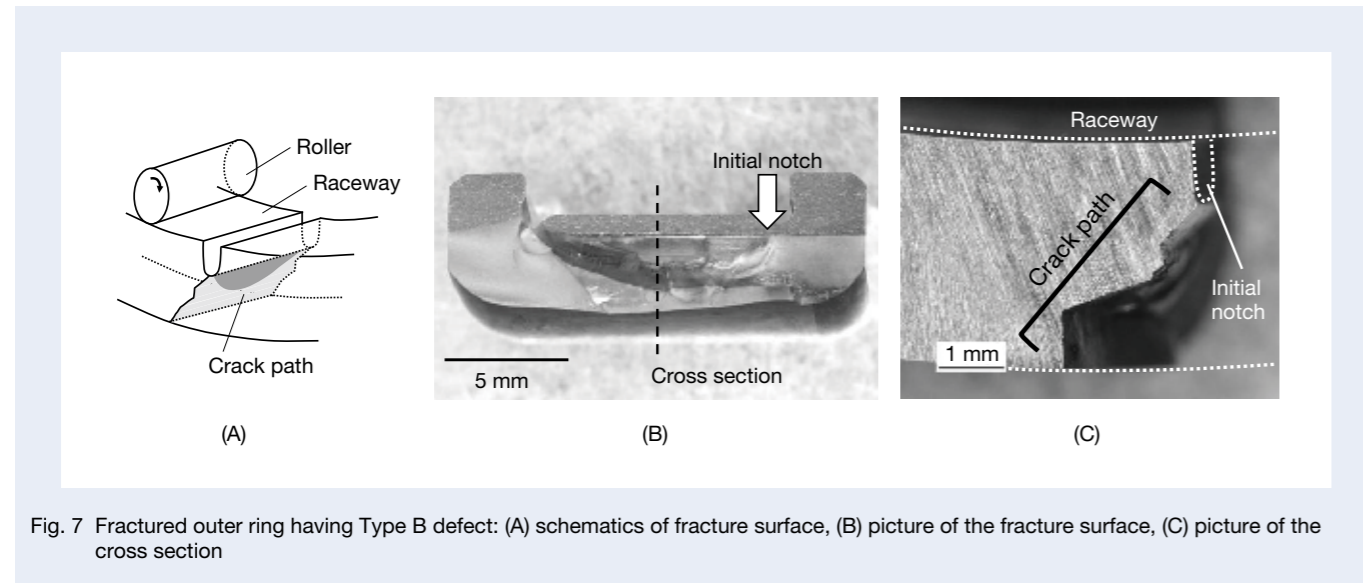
Fractured outer ring having Type B defect: (A) schematics of fracture surface, (B) picture of the fracture surface, (C) picture of the cross section
